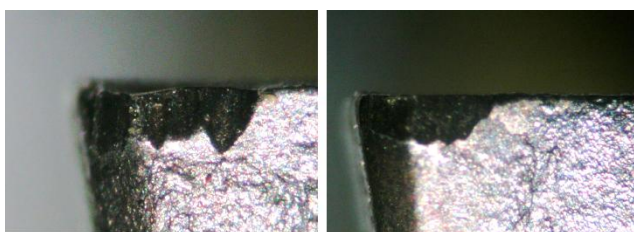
Flank wear images of carbide inserts after machining (a) Sample-I (b) Sample-II steels.
